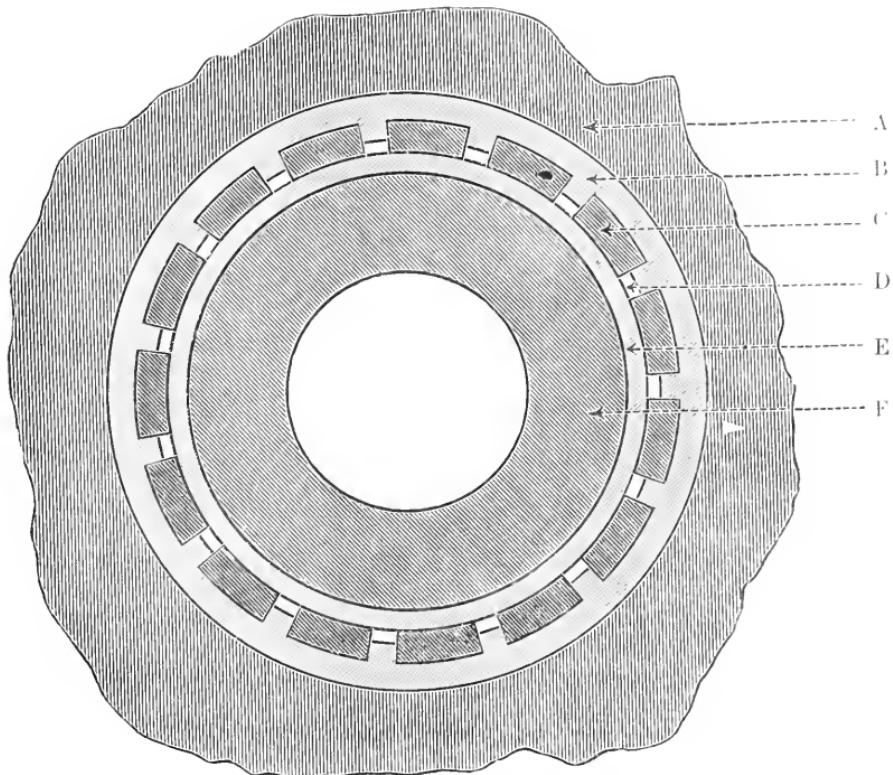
CROSS SECTION OF SHAFT IN LIGNUM VITE BEARING.
